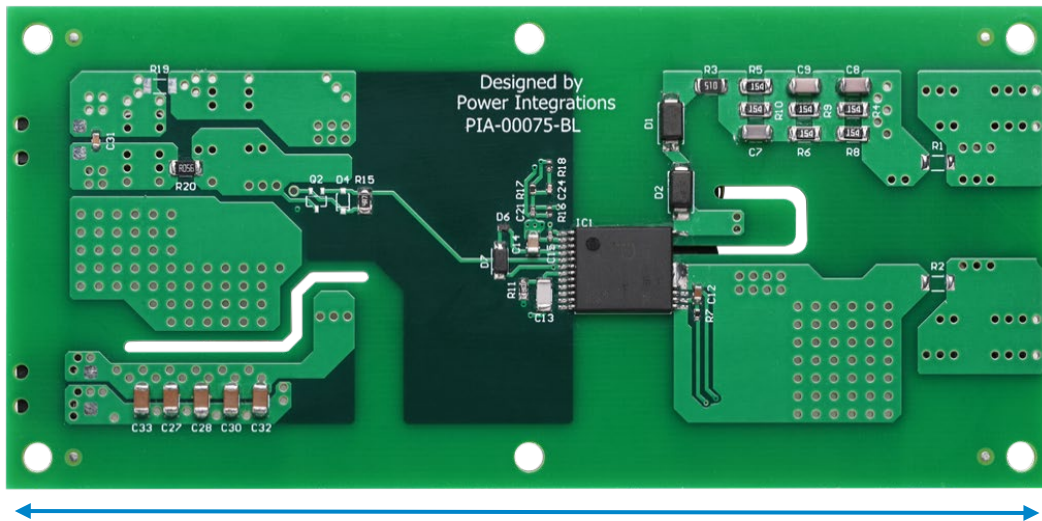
Populated Circuit Board Photograph, Entire Assembly.
